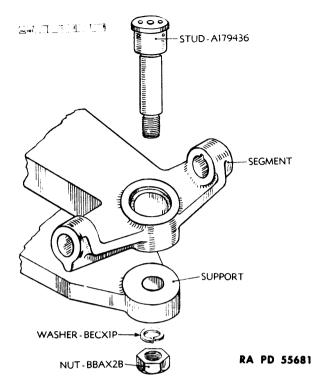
Gear Segment and Support—Assembly at Front End— Exploded View
